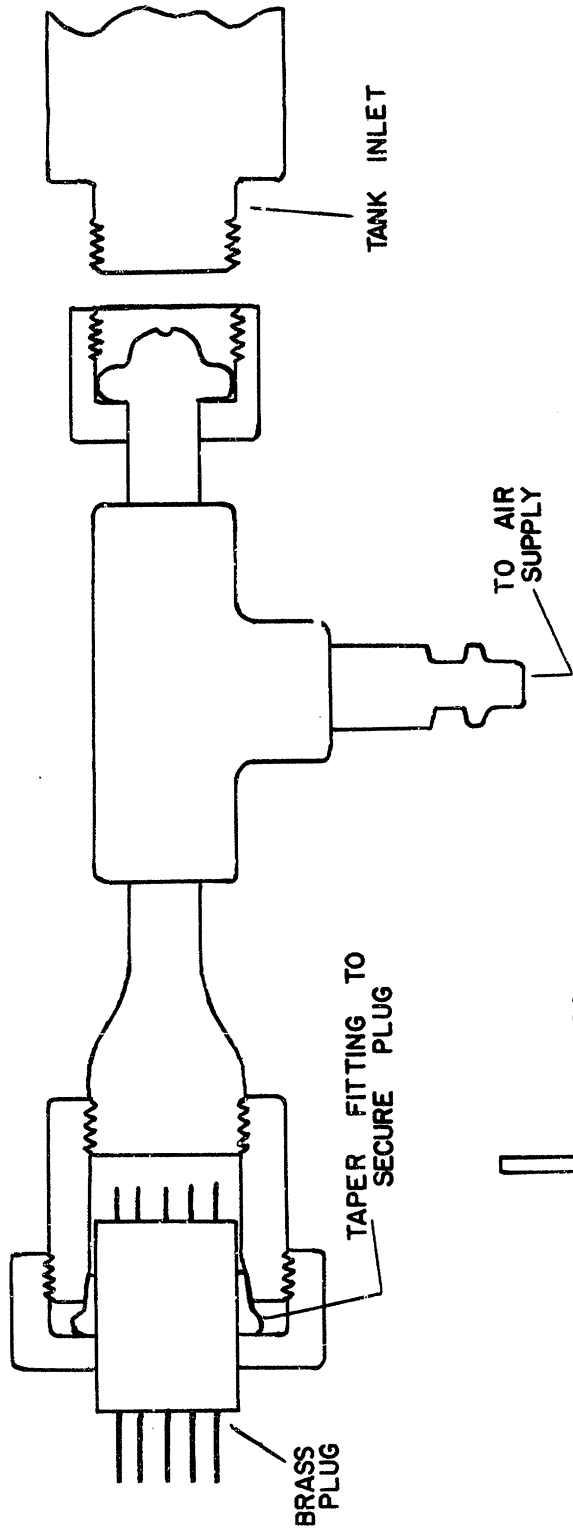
THERMOCOUPLE INLET ASSEMBLY
